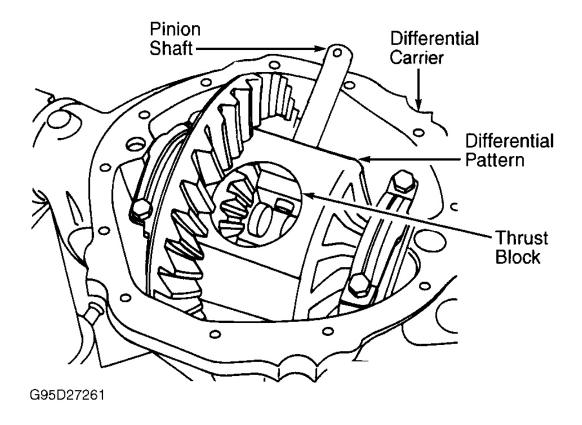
Removing Axle From Locking Differential Assembly Courtesy of GENERAL MOTORS CORP.
